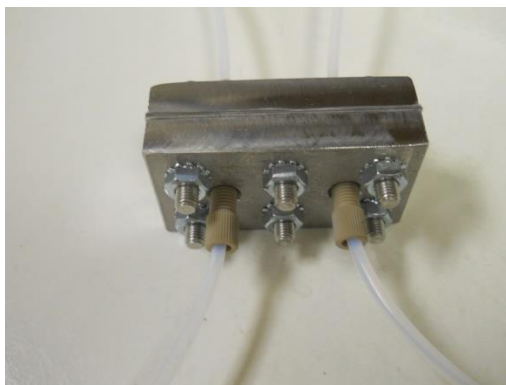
Discarded SS316 block locks ferrule on port assembly
